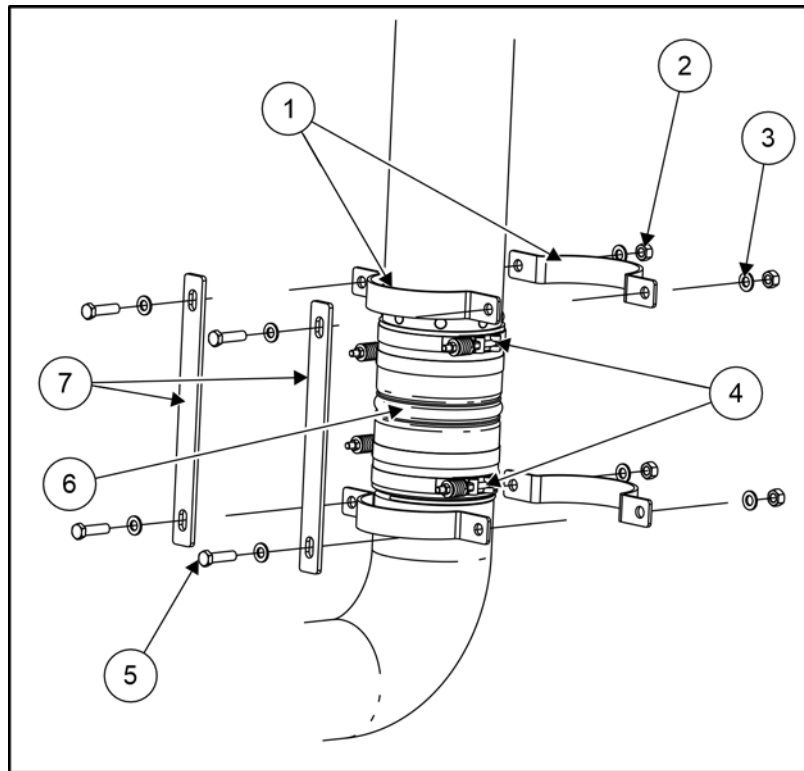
CHARGE AIR COOLER PIPE CLAMP DETAIL
